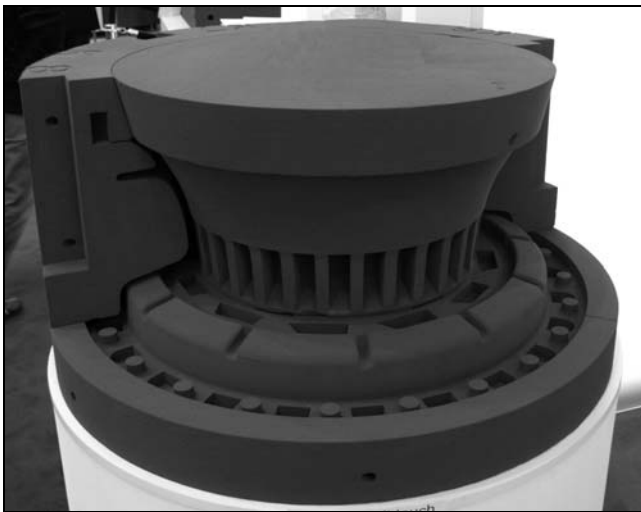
Diffuser mould section printed out by ProMetal RCT device
